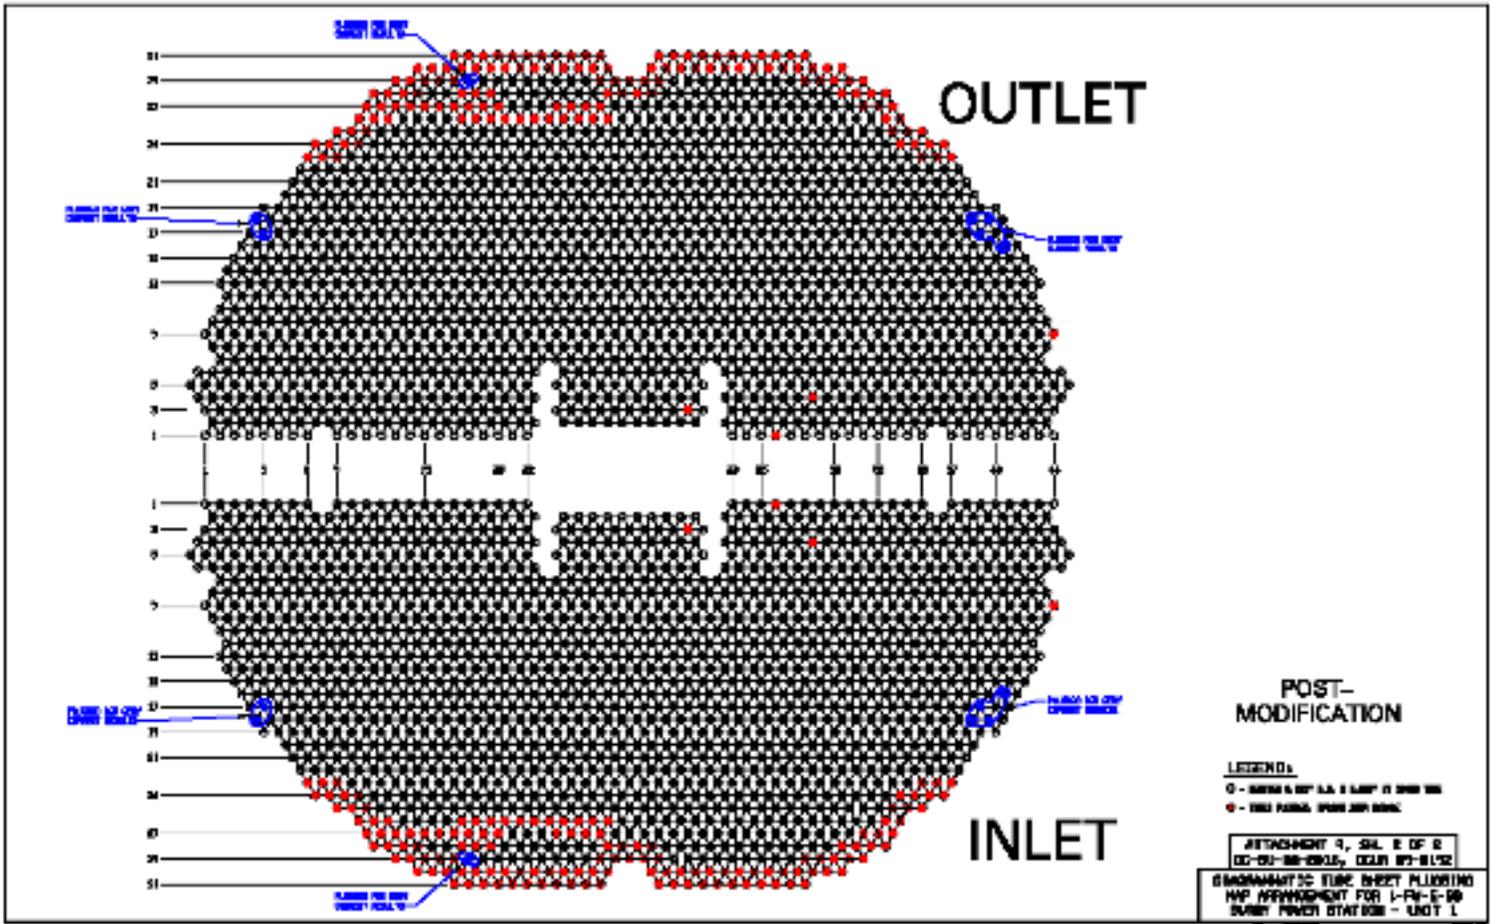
107 tubes staked and plugged to protect the new and existing tubes from future damage.
